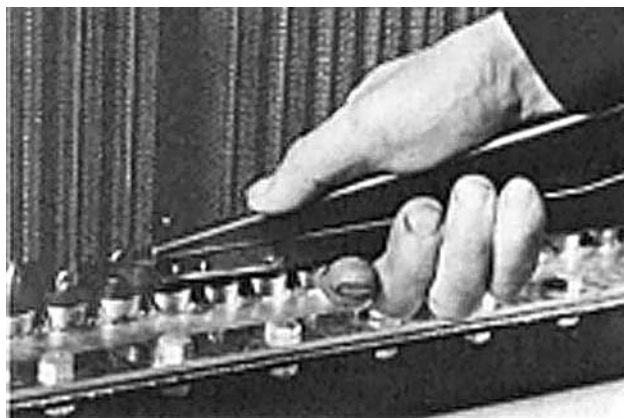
USING INSTALLATION TOOL (VJ6567) TO INSTALL TUBE
